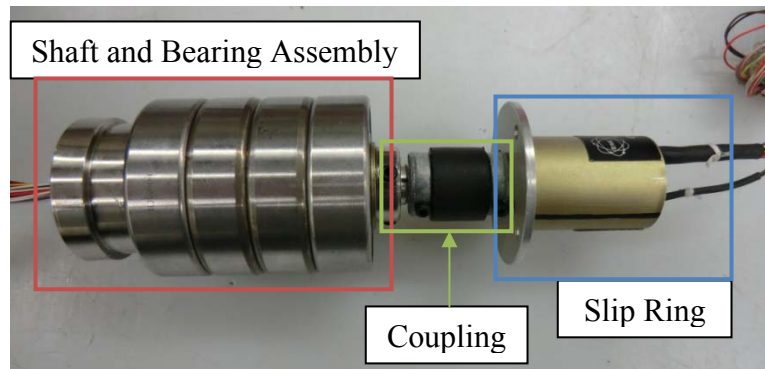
Slip ring attached to rotor shaft and bearing assembly by a flexible coupling.
